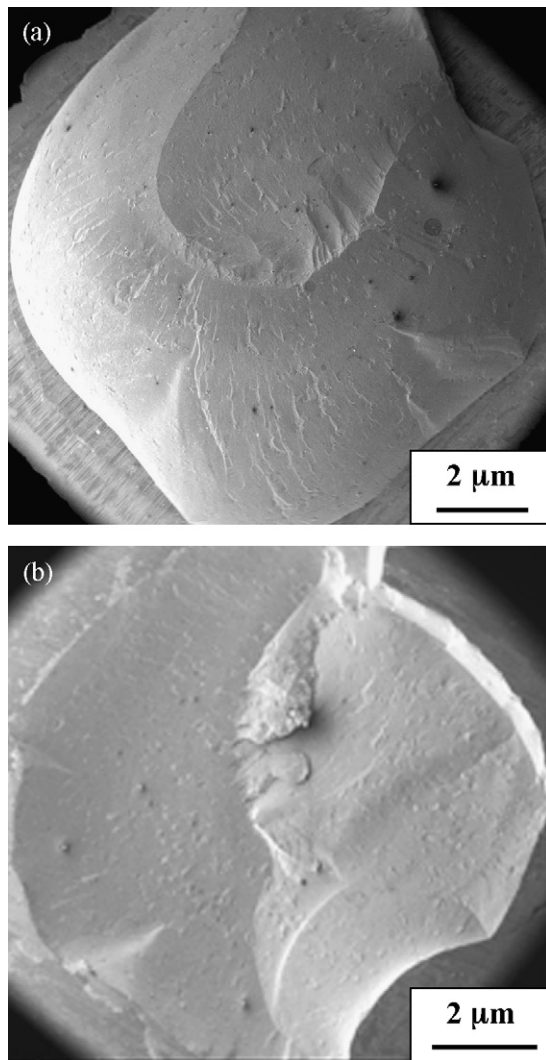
Shear broken joints fractured in the ceramic matrix: (a) metal side; (b) ceramic side.
